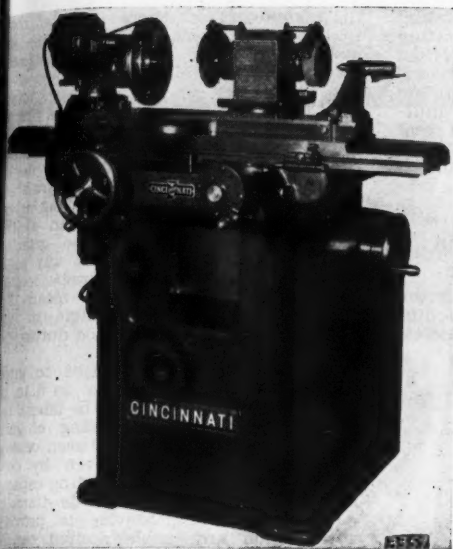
Front view of Improved Cincinnati No. 2 Cutter and Tool Sharpening Machine.
